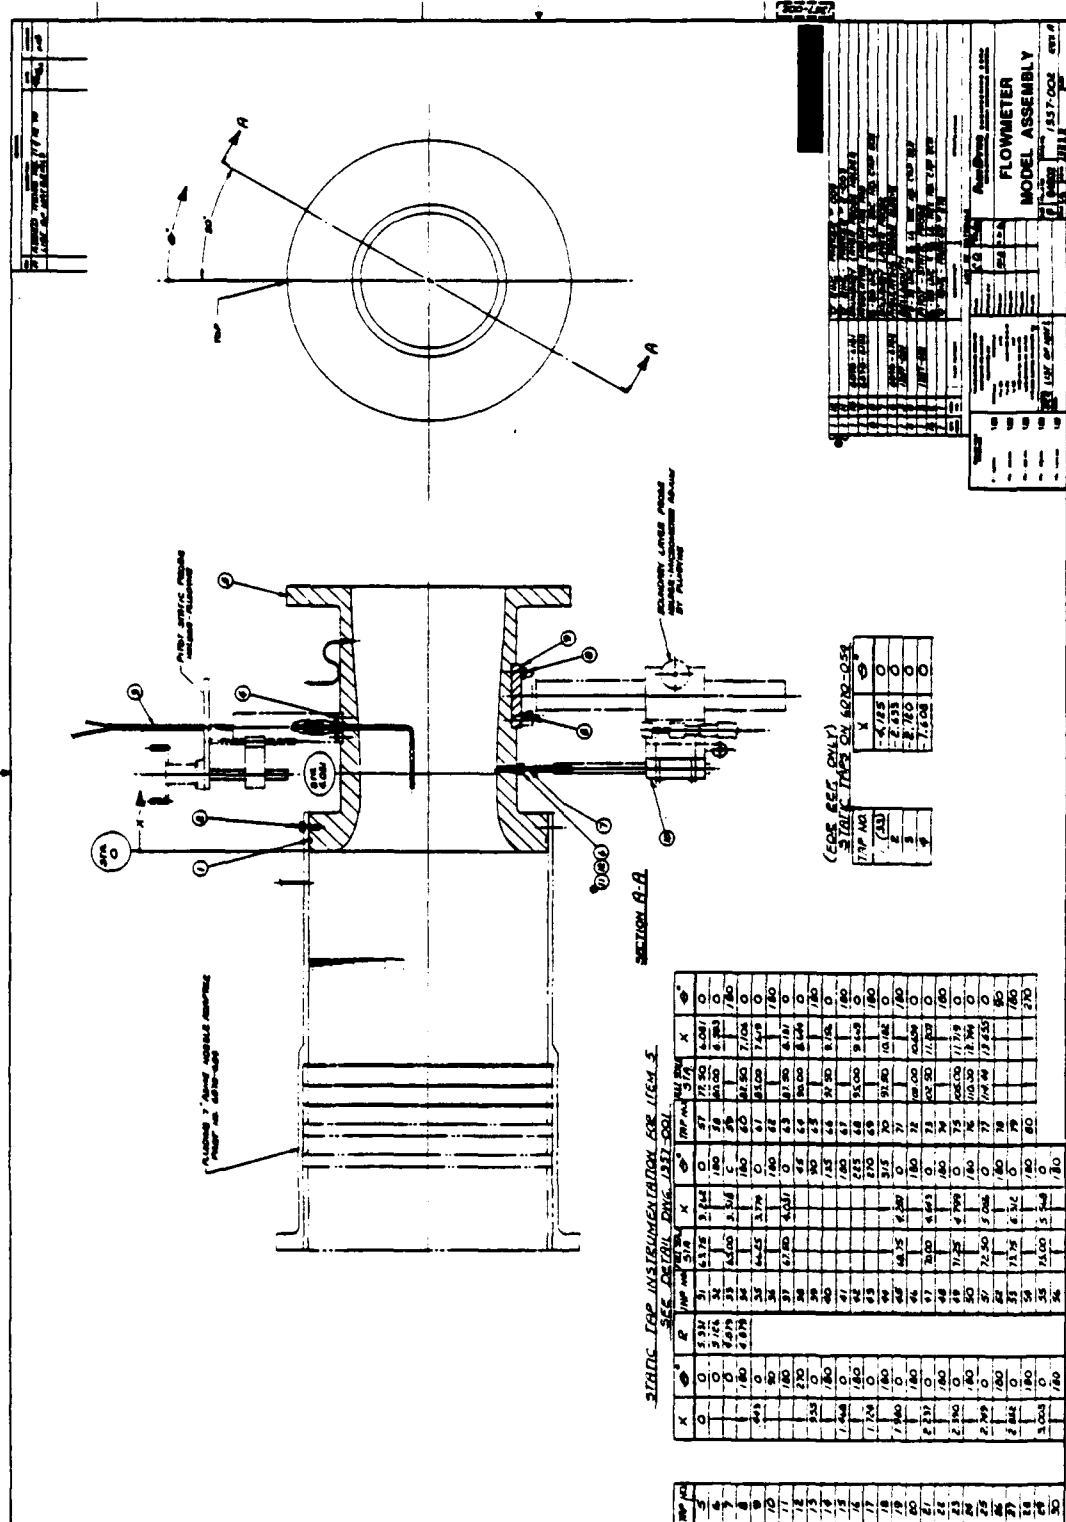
FLOWMETER TEST ASSEMBLY.
